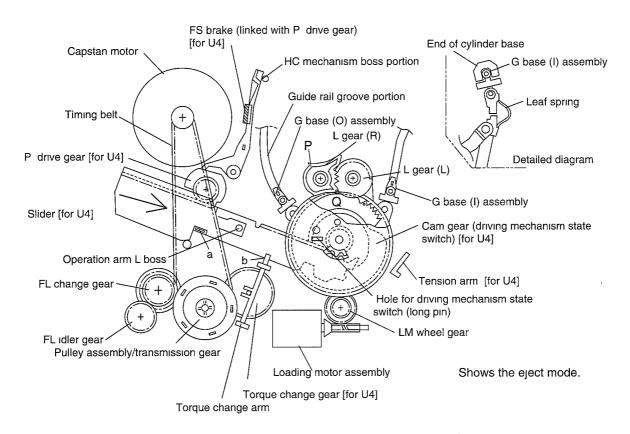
Loading Mechanism Drive Mechanism (Back View)
